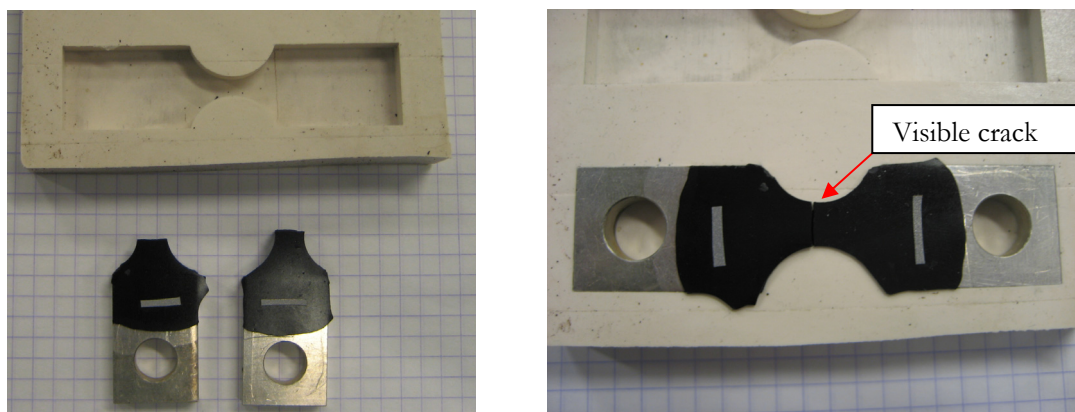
Illustration of placing the two broken pieces (left) into the silicone rubber mould (right)
